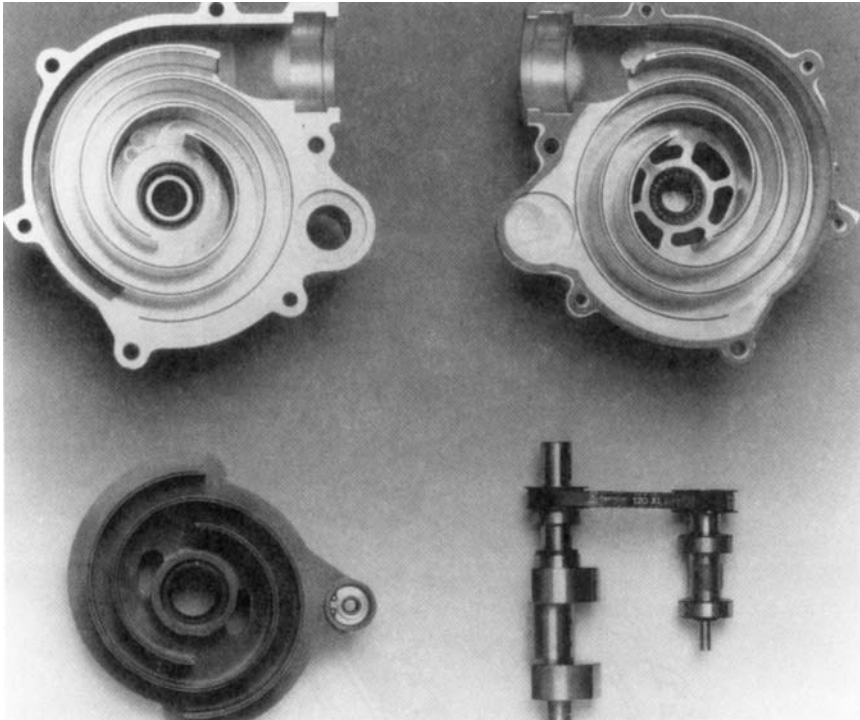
Key components of the G-lader supercharger. At the top are the two halves of the housing with the fixed G-shaped spiral chambers. In the lower left is the G-shaped rotating element that mates with the spiral in the housing. The shaft element that provides the oscillating motion is shown in the right corner. (Courtesy Volkswagen AG.)
